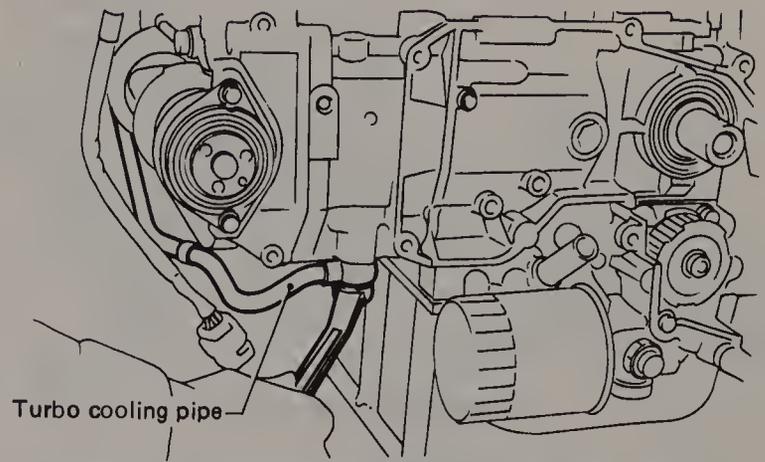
Remove the turbocharger cooling pipe (Sec 5)
